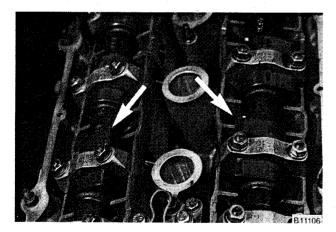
Camshaft correctly positioned for reassembly so that cylinder no. 1 lobes (arrows) face each other.
